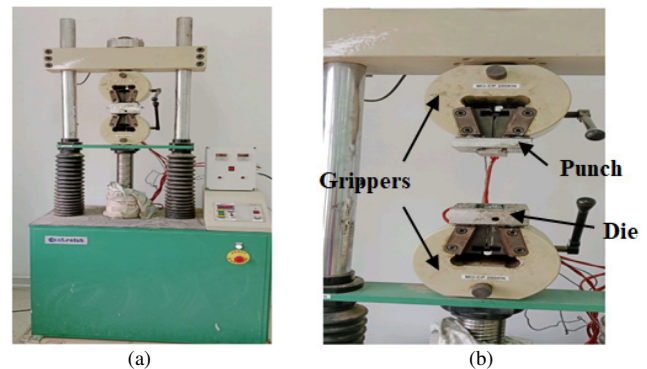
Experimental set-up for the elaboration of the new material: (a) PLA/PO compression phase, (b) die/punch after the disassembly of the PLA/PO plate.
